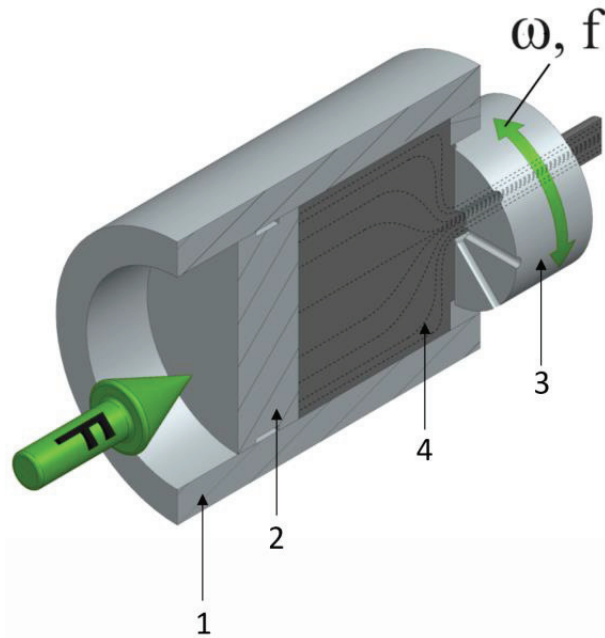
Schematic of KOBO extrusion process: 1- container sleeve, 2- butt, 3- die, 4- billet
